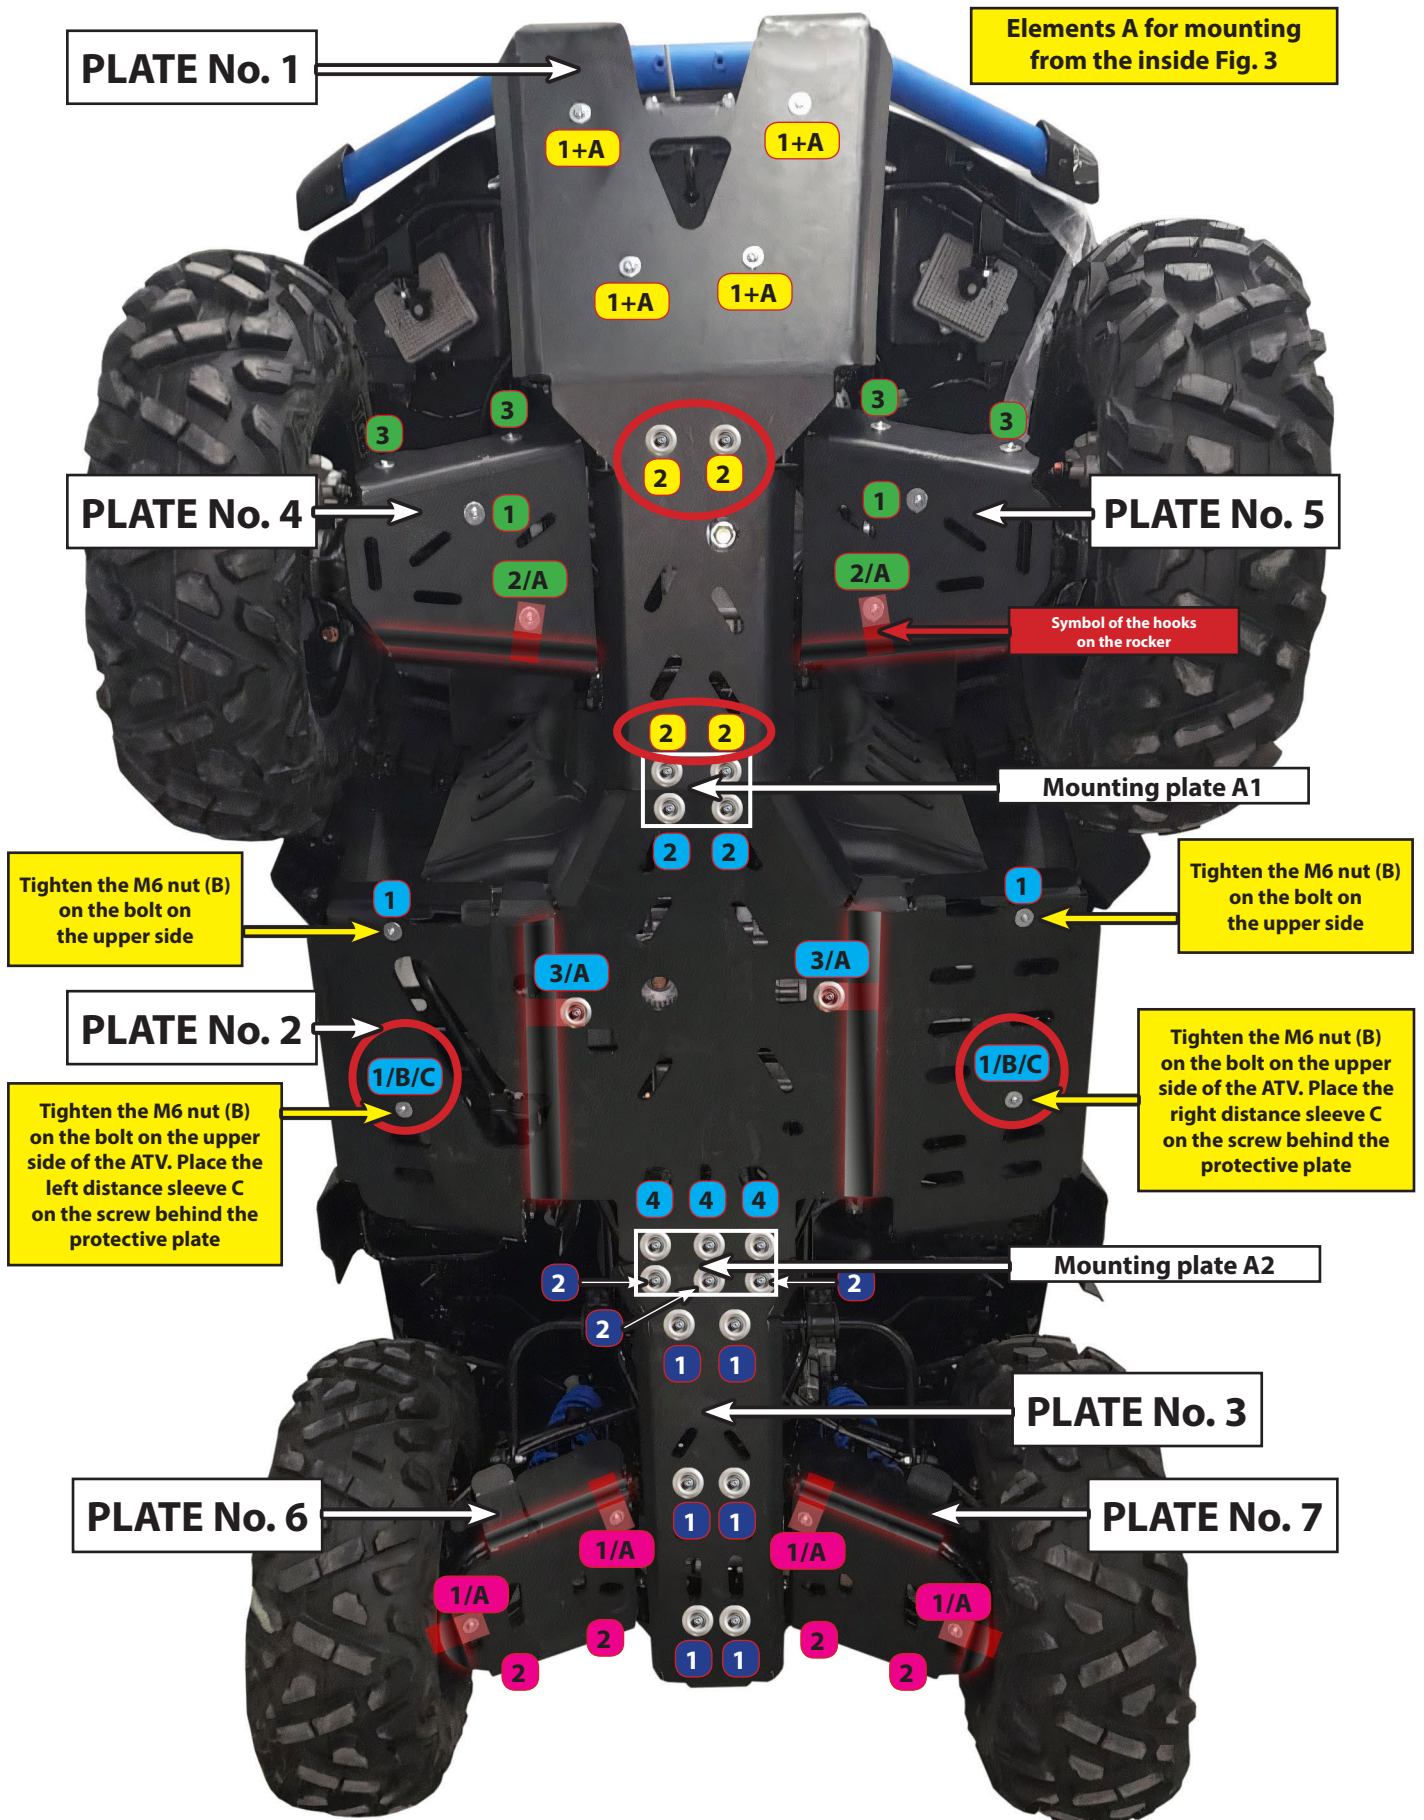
and 5] First, put the cover and install the hooks (orientation on the diagram) to the front rocker arms covers, do not fully tighten the screws, center the cover on the appropriate holes and tighten the screws, not forgetting the washers :-). Position the cover and tighten the screws. Make a double check, if there is no contact between the wheel and the guard by turning your steering wheel completely right and left, in the event of a contact, make the proper adjustment of the guard by moving it to the correct position. Also check, if there is sufficient space between the front protection plate and the rocker arm covers to avoid contact in the event of complete compression of the suspension.
